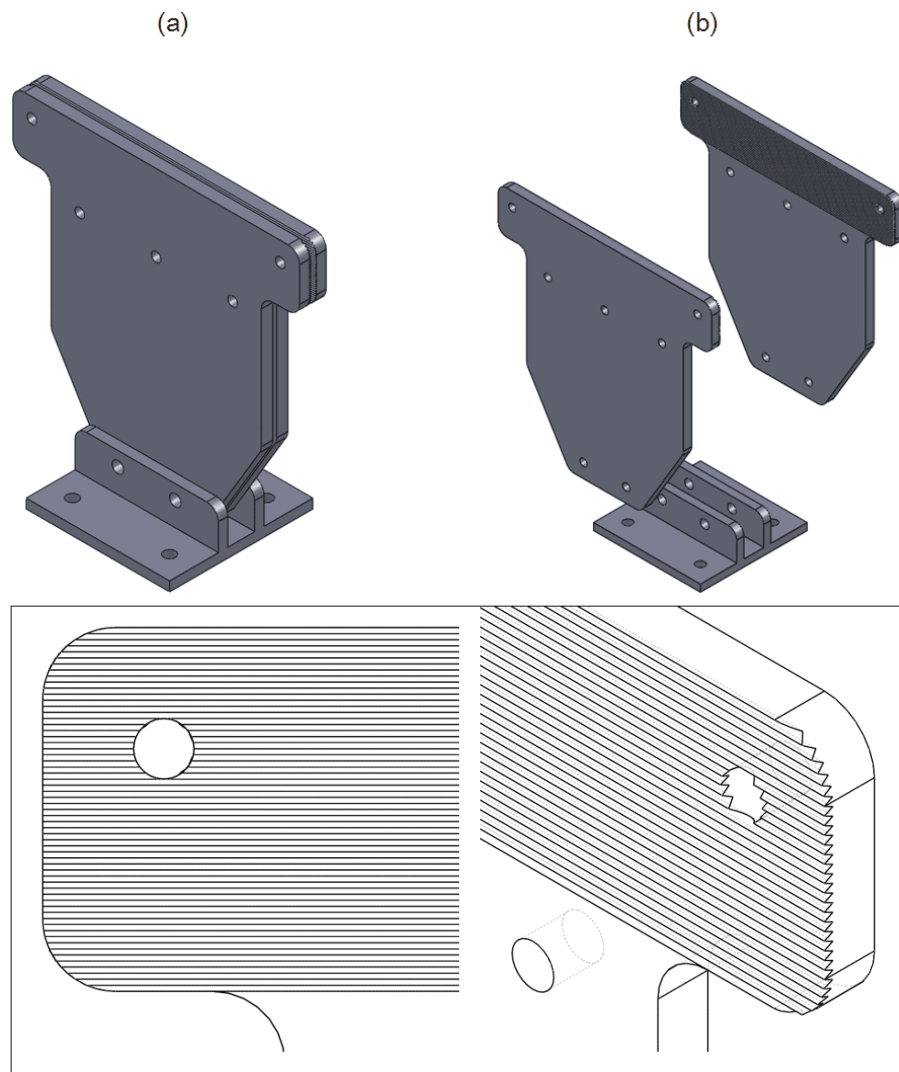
Planar clamps for uniaxial tensile tests: *Top* (a) the pair of clamps in position for holding the sample, (b) Exploded assembly. *Bottom* Details of the fluted surface.
